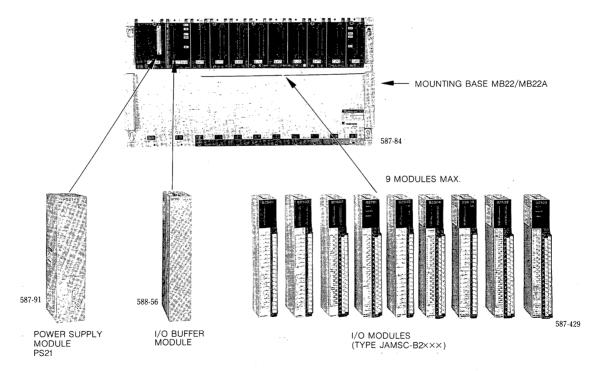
Module Mounting on Mounting Base MB22/MB22A
